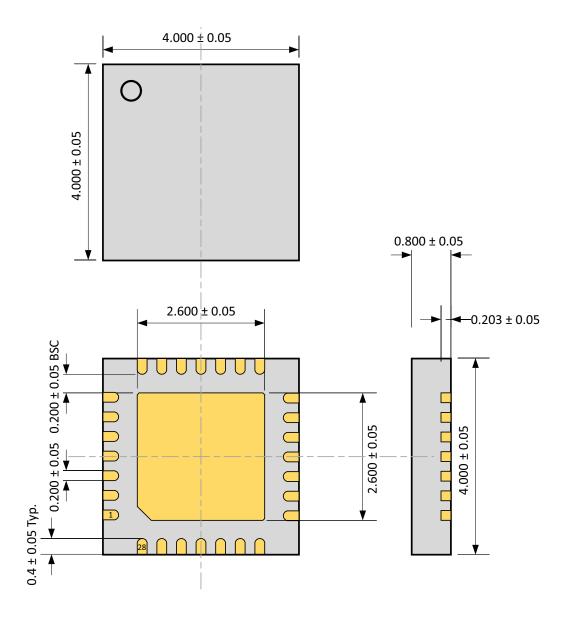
QFN 28-pin 4x4mm Drawing (All Dimensions in mm)
